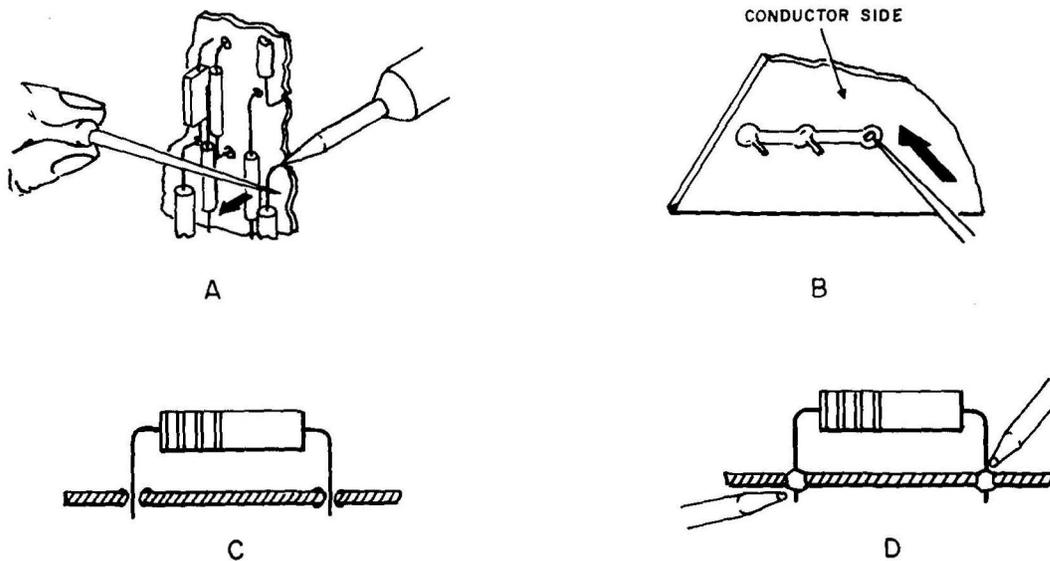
Servicing Etched Circuit Boards—Conventional Method
